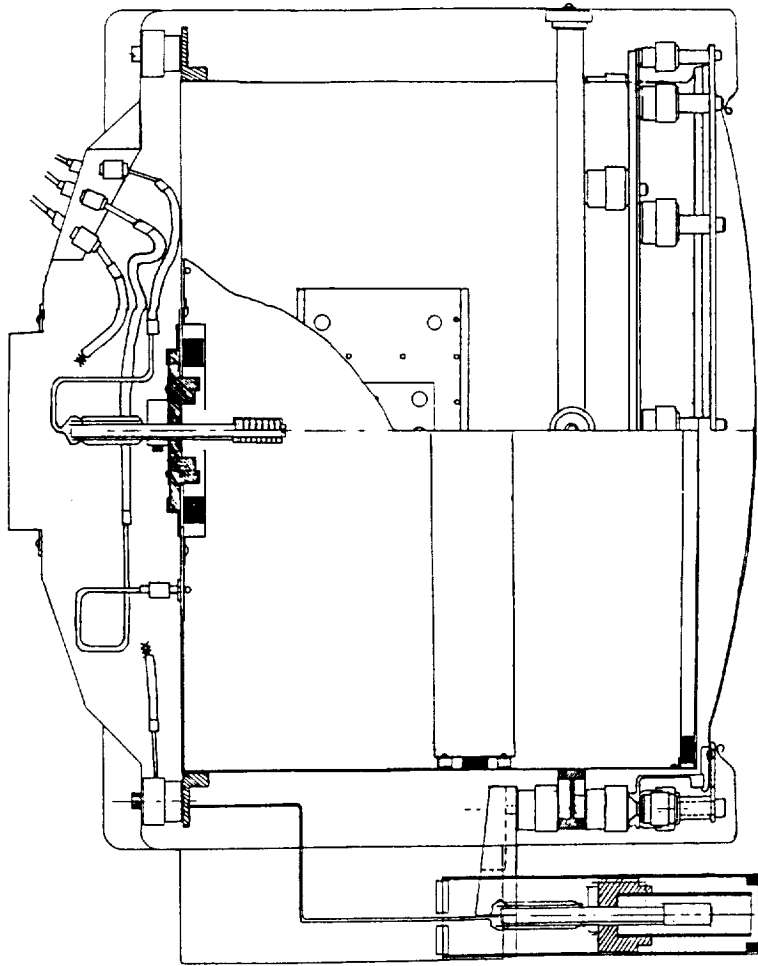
Cutaway drawing of the 30 cm derated ion thruster.
